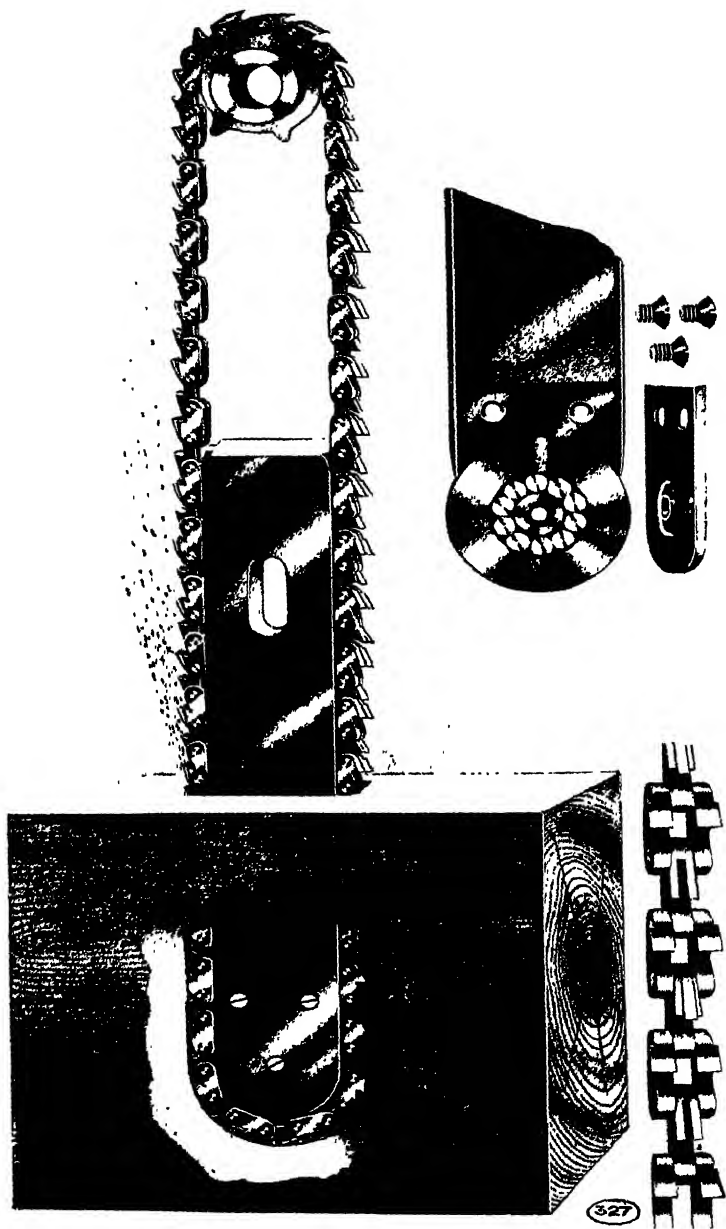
MORTISING MACHINE WITH CHAIN CUTTER.
